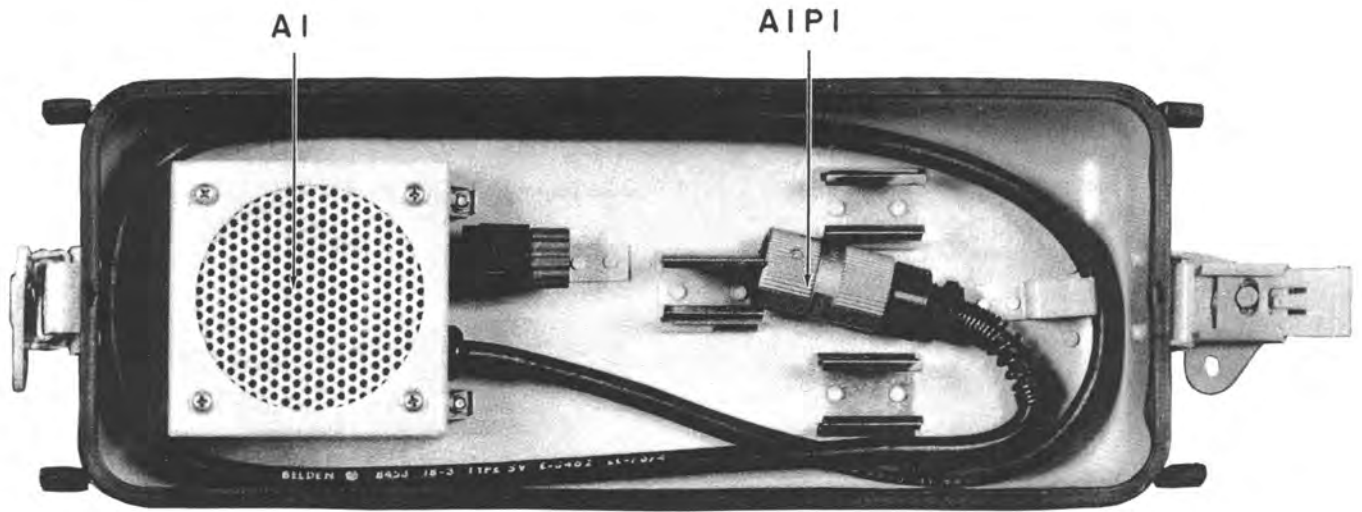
Type 796140 Front Cover Assembly with Removable Speaker Assembly (A11), Location of Components
